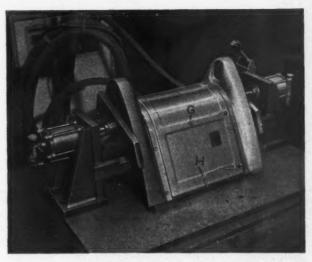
This pneumatically-operated fixture is employed to facilitate spot-welding the centre section sub-assembly
